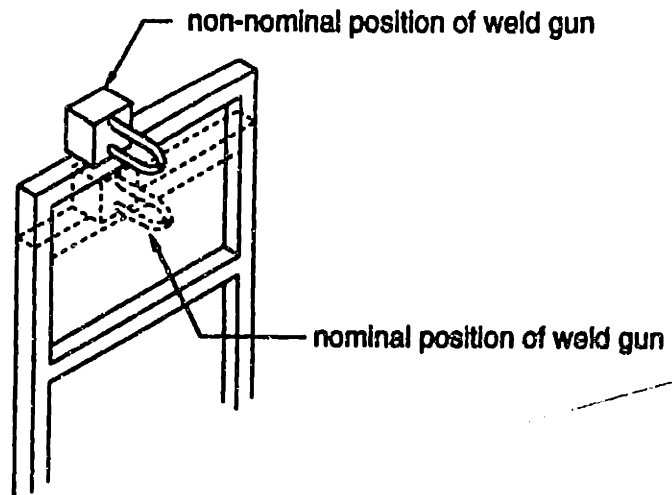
Example of non-nominal position of a weld gun
